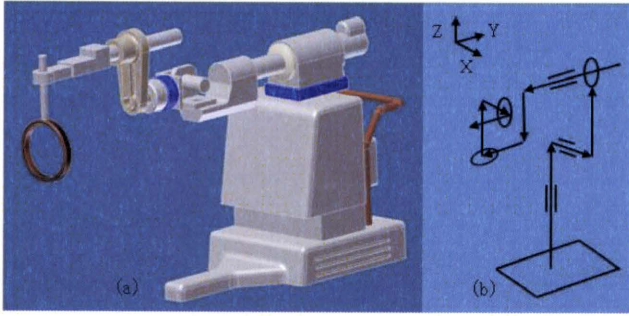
Fracture-reduction robot; (a) outline, two blue parts show mechanical failsafe units and (b) kinematic model and coordinates of the robot
